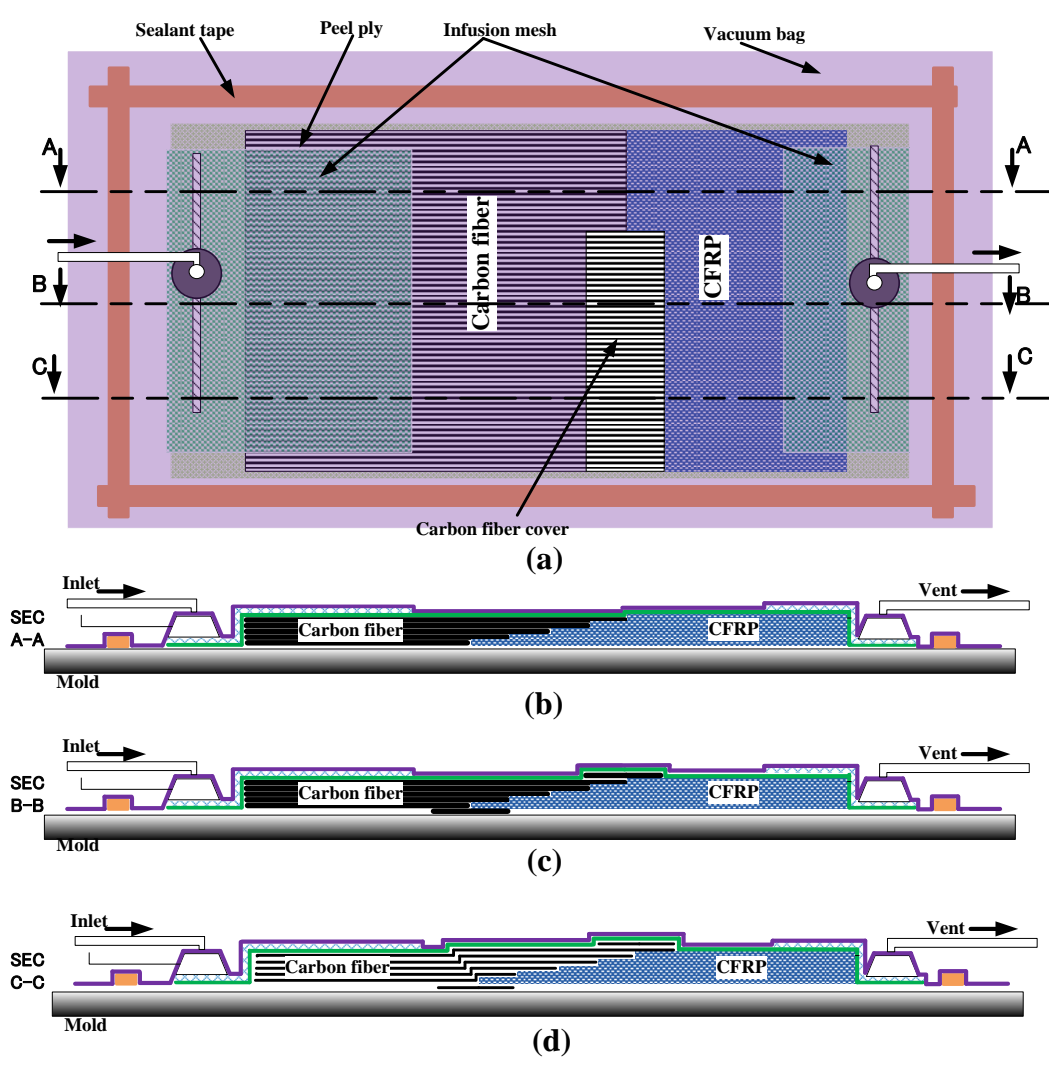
(a) Schematic view of the joints. (b) Sectional side view of the original staircase joint. (c) Sectional side view of the staircase joint with covers. (d) Sectional side view of the overlapped staircase joint.
